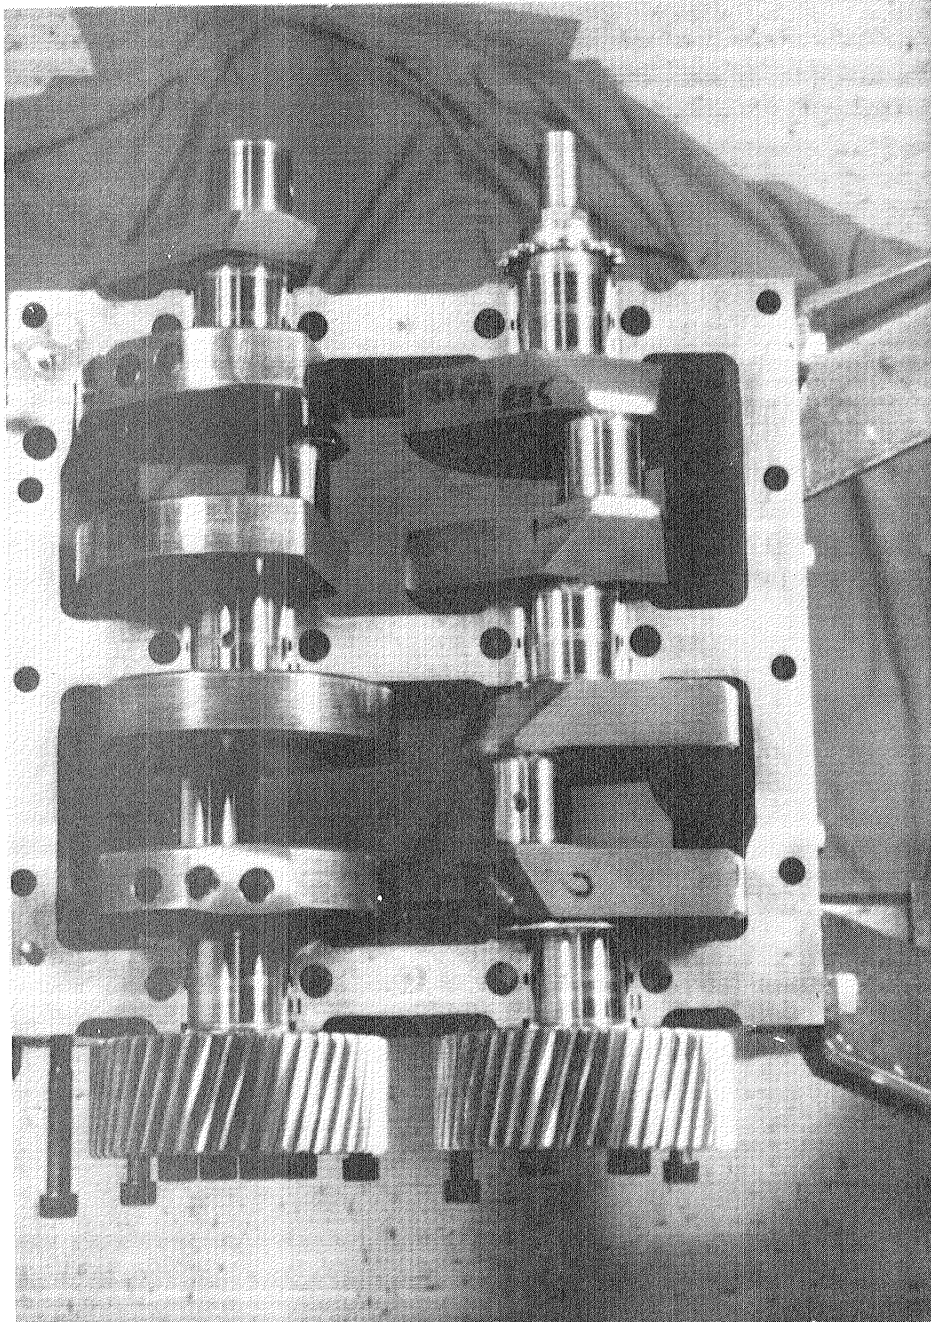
Parallel Crankshafts With Bedplate Assembly
